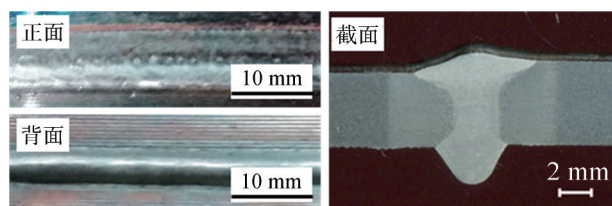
Morphology of the laser-arc hybrid welding joint (2 mm root face)
